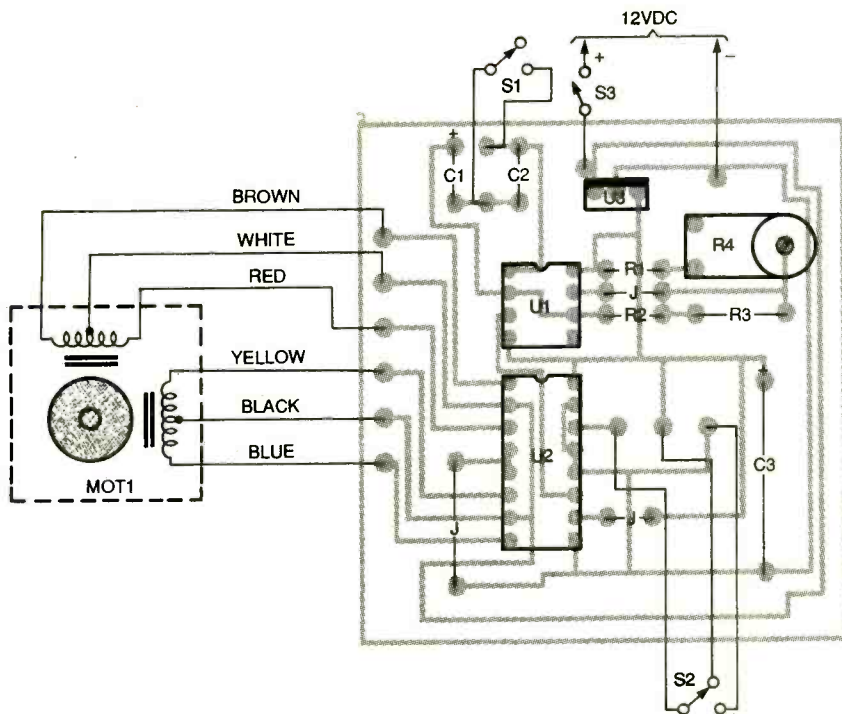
This parts-placement diagram should make building the control circuit easier.
